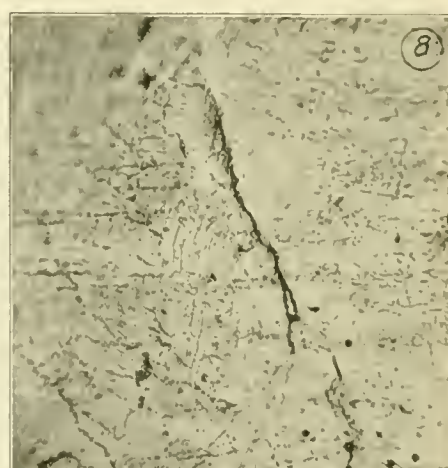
Oxy-acetylene weld showing heavy slipping at grain boundary. This is not a crack, but shows a weakness.
